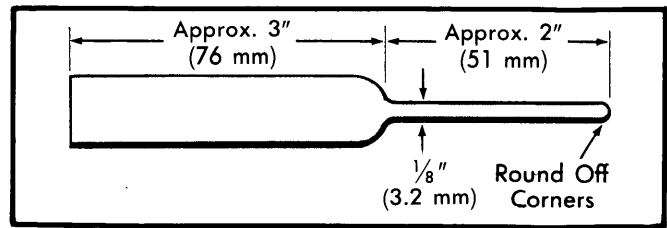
Rear Main Bearing Oil Seal Installing Tool
